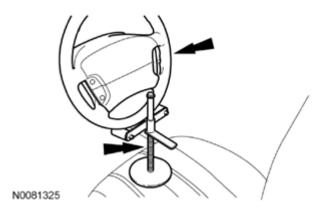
Holding Steering Wheel In Straight-Ahead Position Using Suitable Holding Device Courtesy of FORD MOTOR CO.
